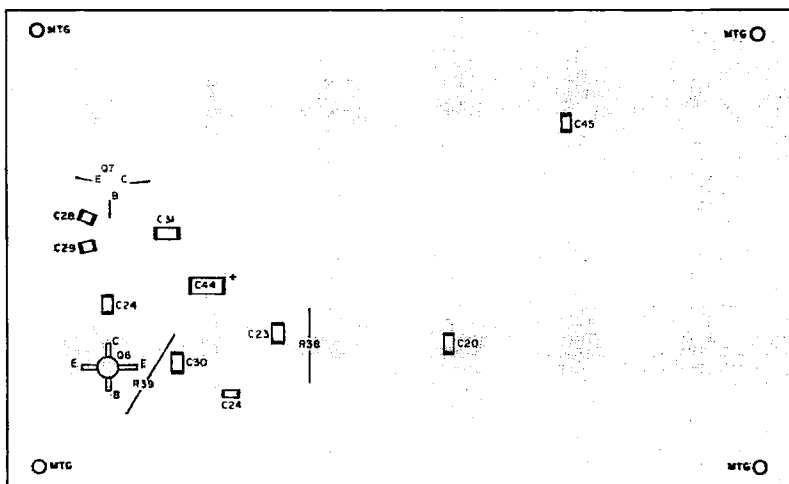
Parts placement of the components that need to be mounted on the solder side of the PC board (the opposite of the component side).
